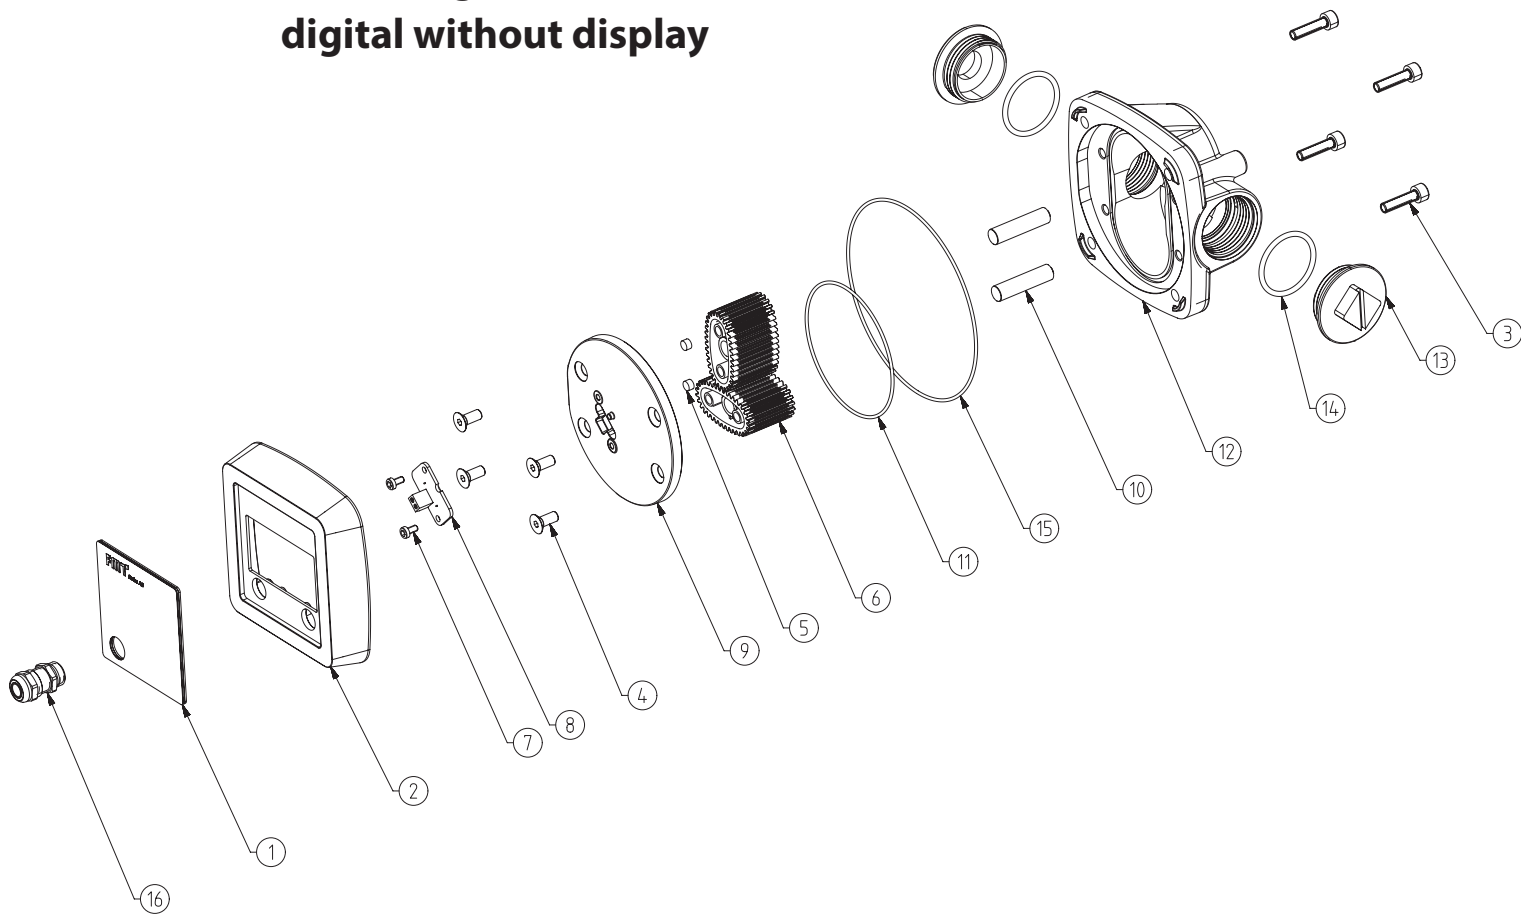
Exploded view pulse meter and oval gear meter – digital without display
